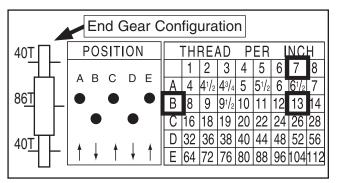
End gear and gearbox lever configuration for 13 TPI.
